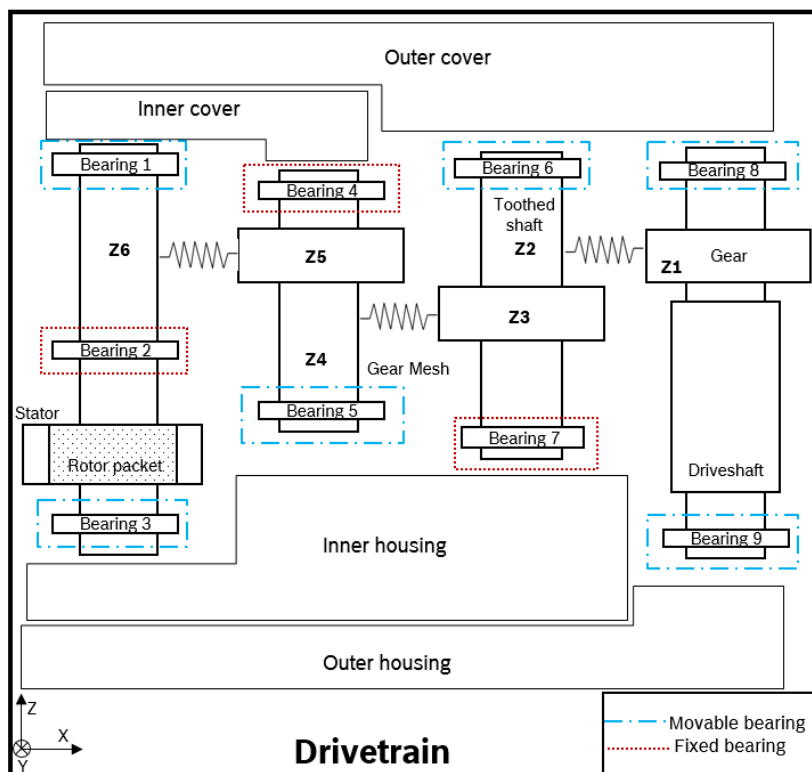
Architectural layout of housings, gears, toothed shafts and bearings of the drivetrain
